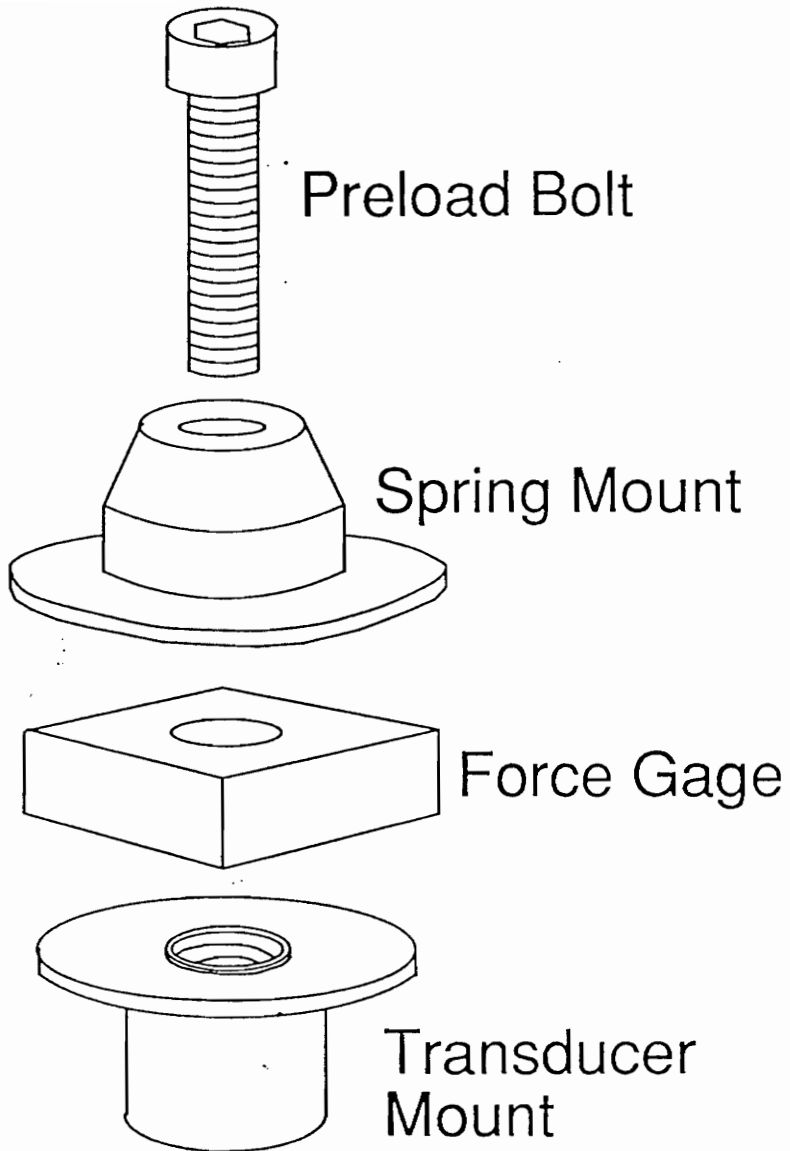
Standard side spring mounting bracket (after [28])
